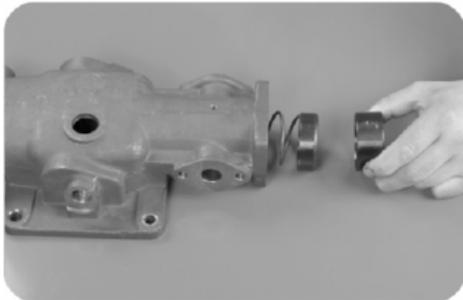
Exploded View of Gearshift Mechanism Assembly Components
